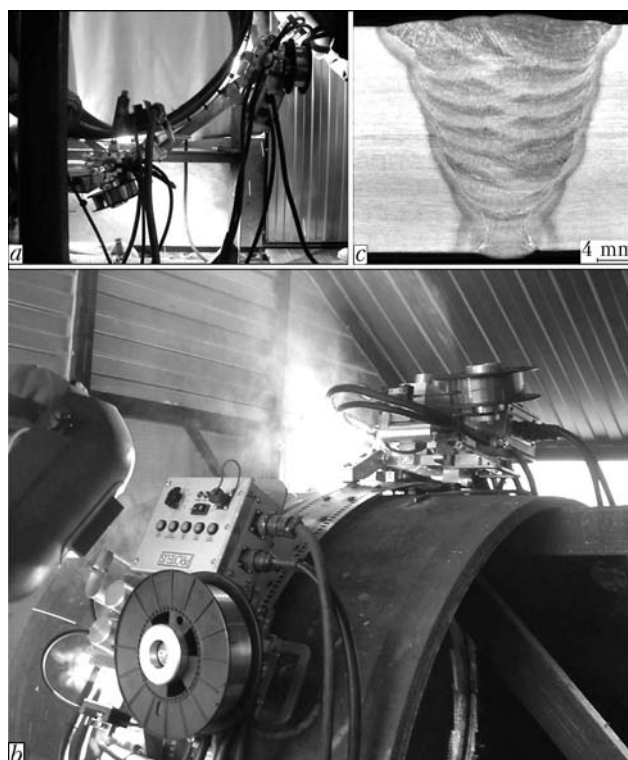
Beginning (*a*) and end (*b*) of automatic welding of position butt of pipelines using PROTEUS complex, and section of pipeline welded joint from K65 steel of 27.7 mm thickness (*c*)
